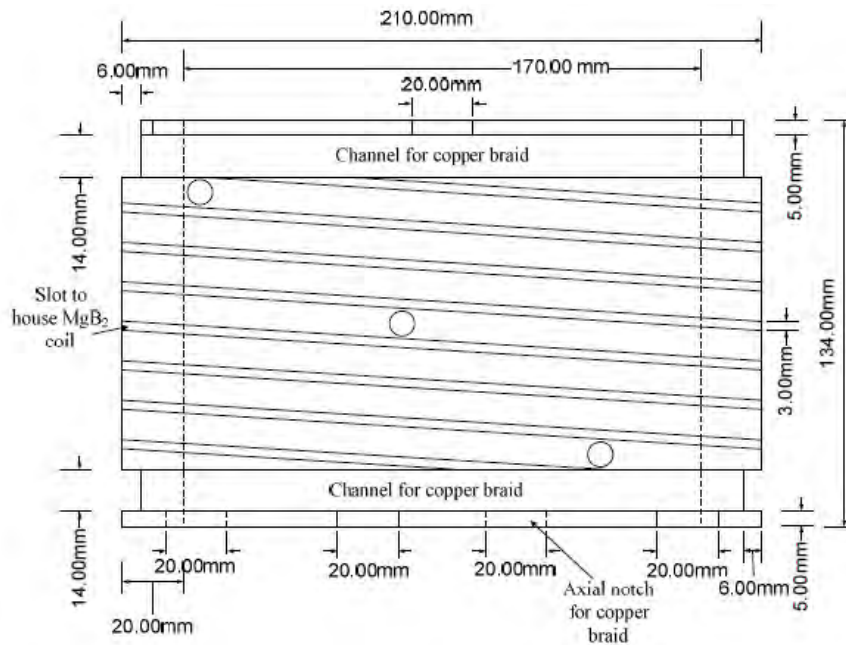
University of Manchester SRCL Former Drawing (Ref. 168).
